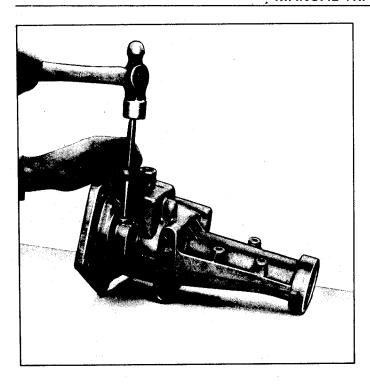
B-17K--Removing Reverse Idler Shaft Roll Pin
